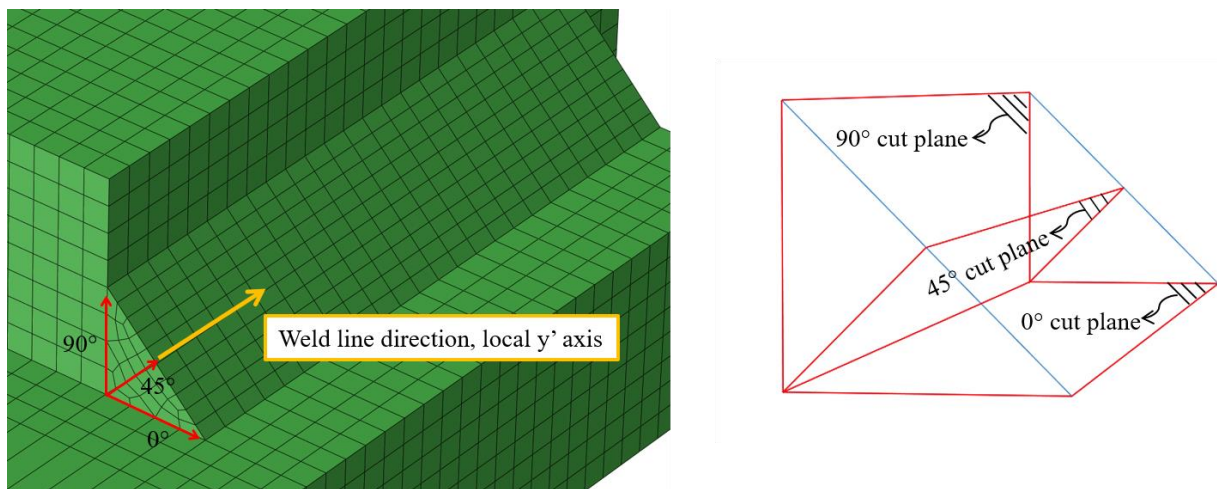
Three cut planes through weld for calculating longitudinal shear stress along weld line
